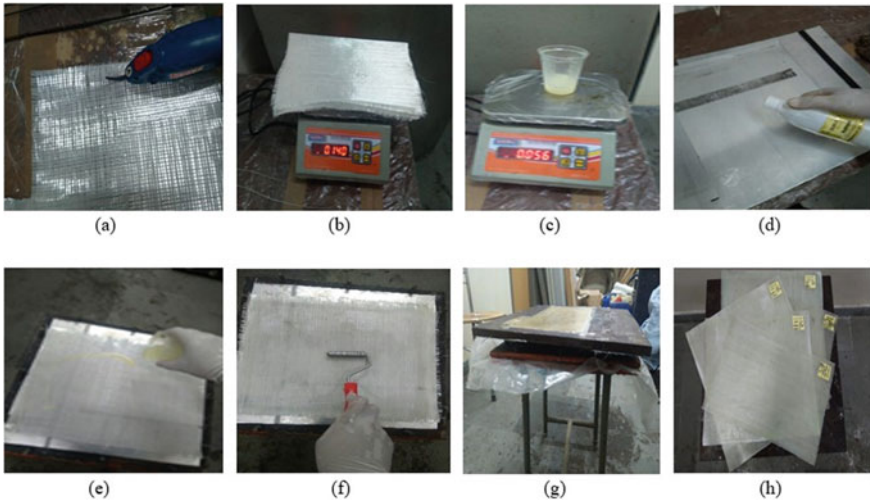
Fabrication of GFRP composite laminates: (a) cutting of unidirectional glass fiber mats; (b) weighting of the glass fiber mats; (c) weighting of the epoxy resin; (d) cleaning of aluminum sheets with acetone; (e) pouring and spreading of epoxy resin with steel putty knife; (f) removal of air bubbles with steel washer roller; (g) pressing the laminate with steel plates; (h) finished GFRP laminates
